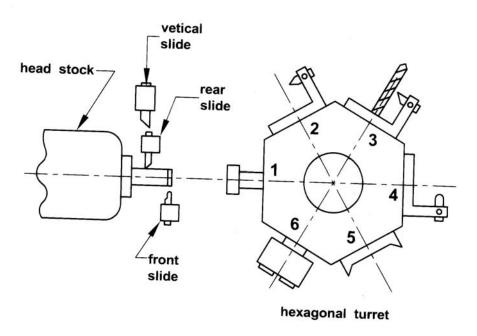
Tool layout for machining the given job in single spindle automatic lathe
